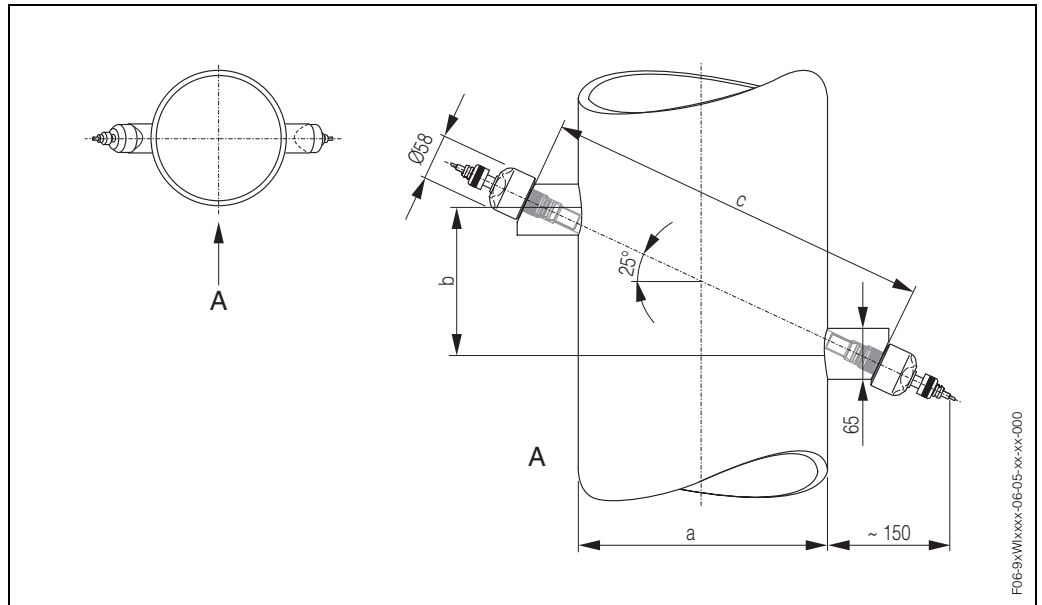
Dimensions of W sensor (Insertion version, single path)
